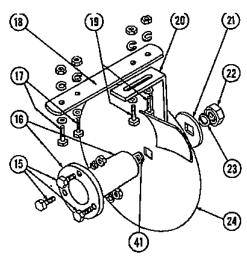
FURROW FILLER ATTACHMENT — MACH, NO. 200080
